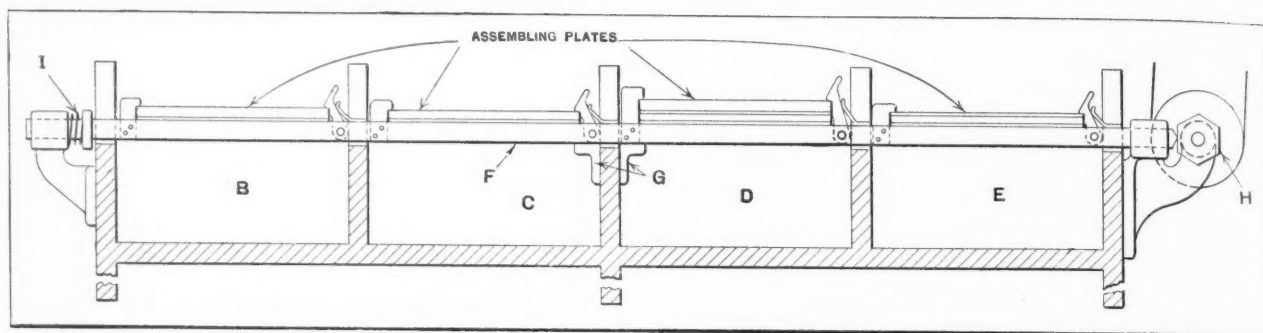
Diagrammatic View of Vibrating Machine Used for Assembling Electrical Switch Parts
